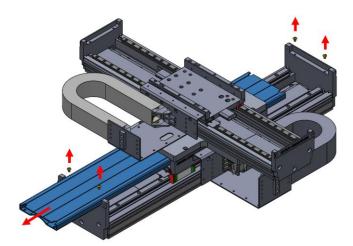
Exploded view of the cover – here for LMSSA2X
